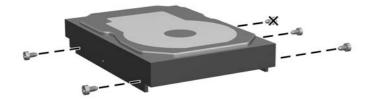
Installing Guide Screws in the Primary Hard Drive
